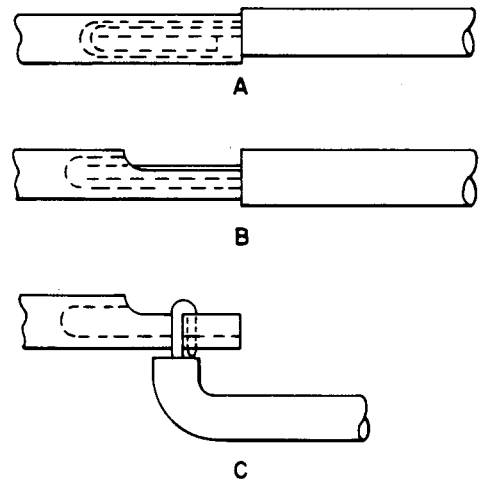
Connections to Tubular Terminals (Solder Not Shown)
